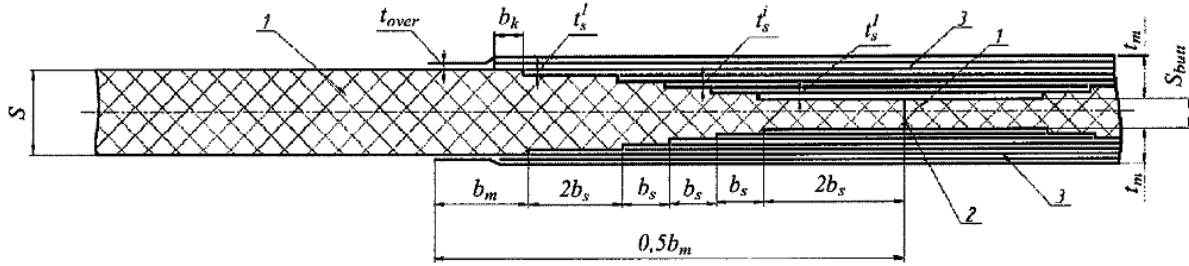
Structural scheme of a moulded butt (seam) joint of single-skin members with double side stepped edge preparation:
